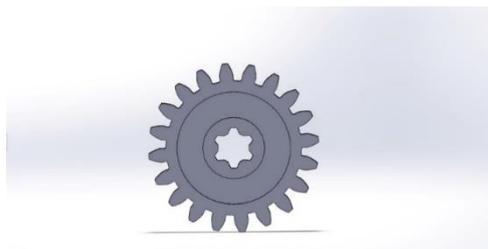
Modeling of 20 gears in SOLIDWORKS 3D environment
